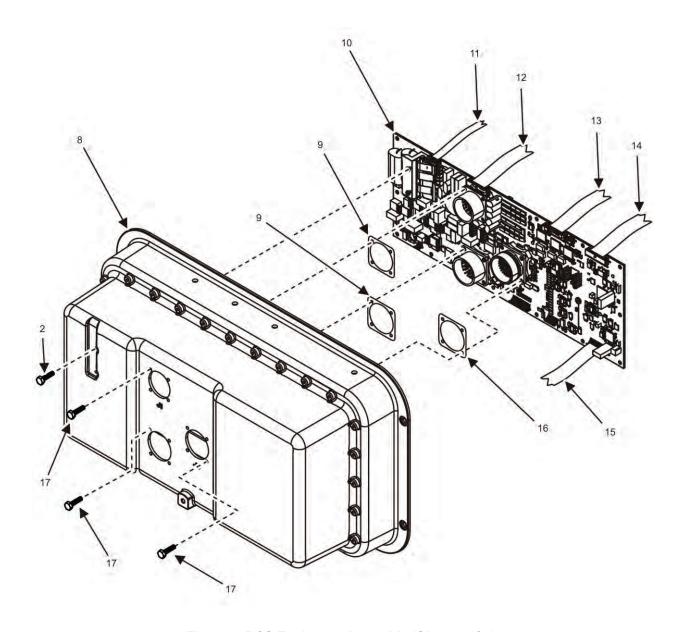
DCS Enclosure Assembly (Sheet 3 of 3).
